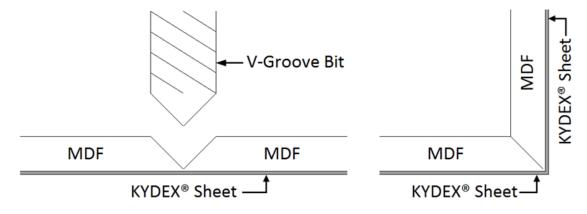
Miter Folded KYDEX® Sheet and MDF Panel
